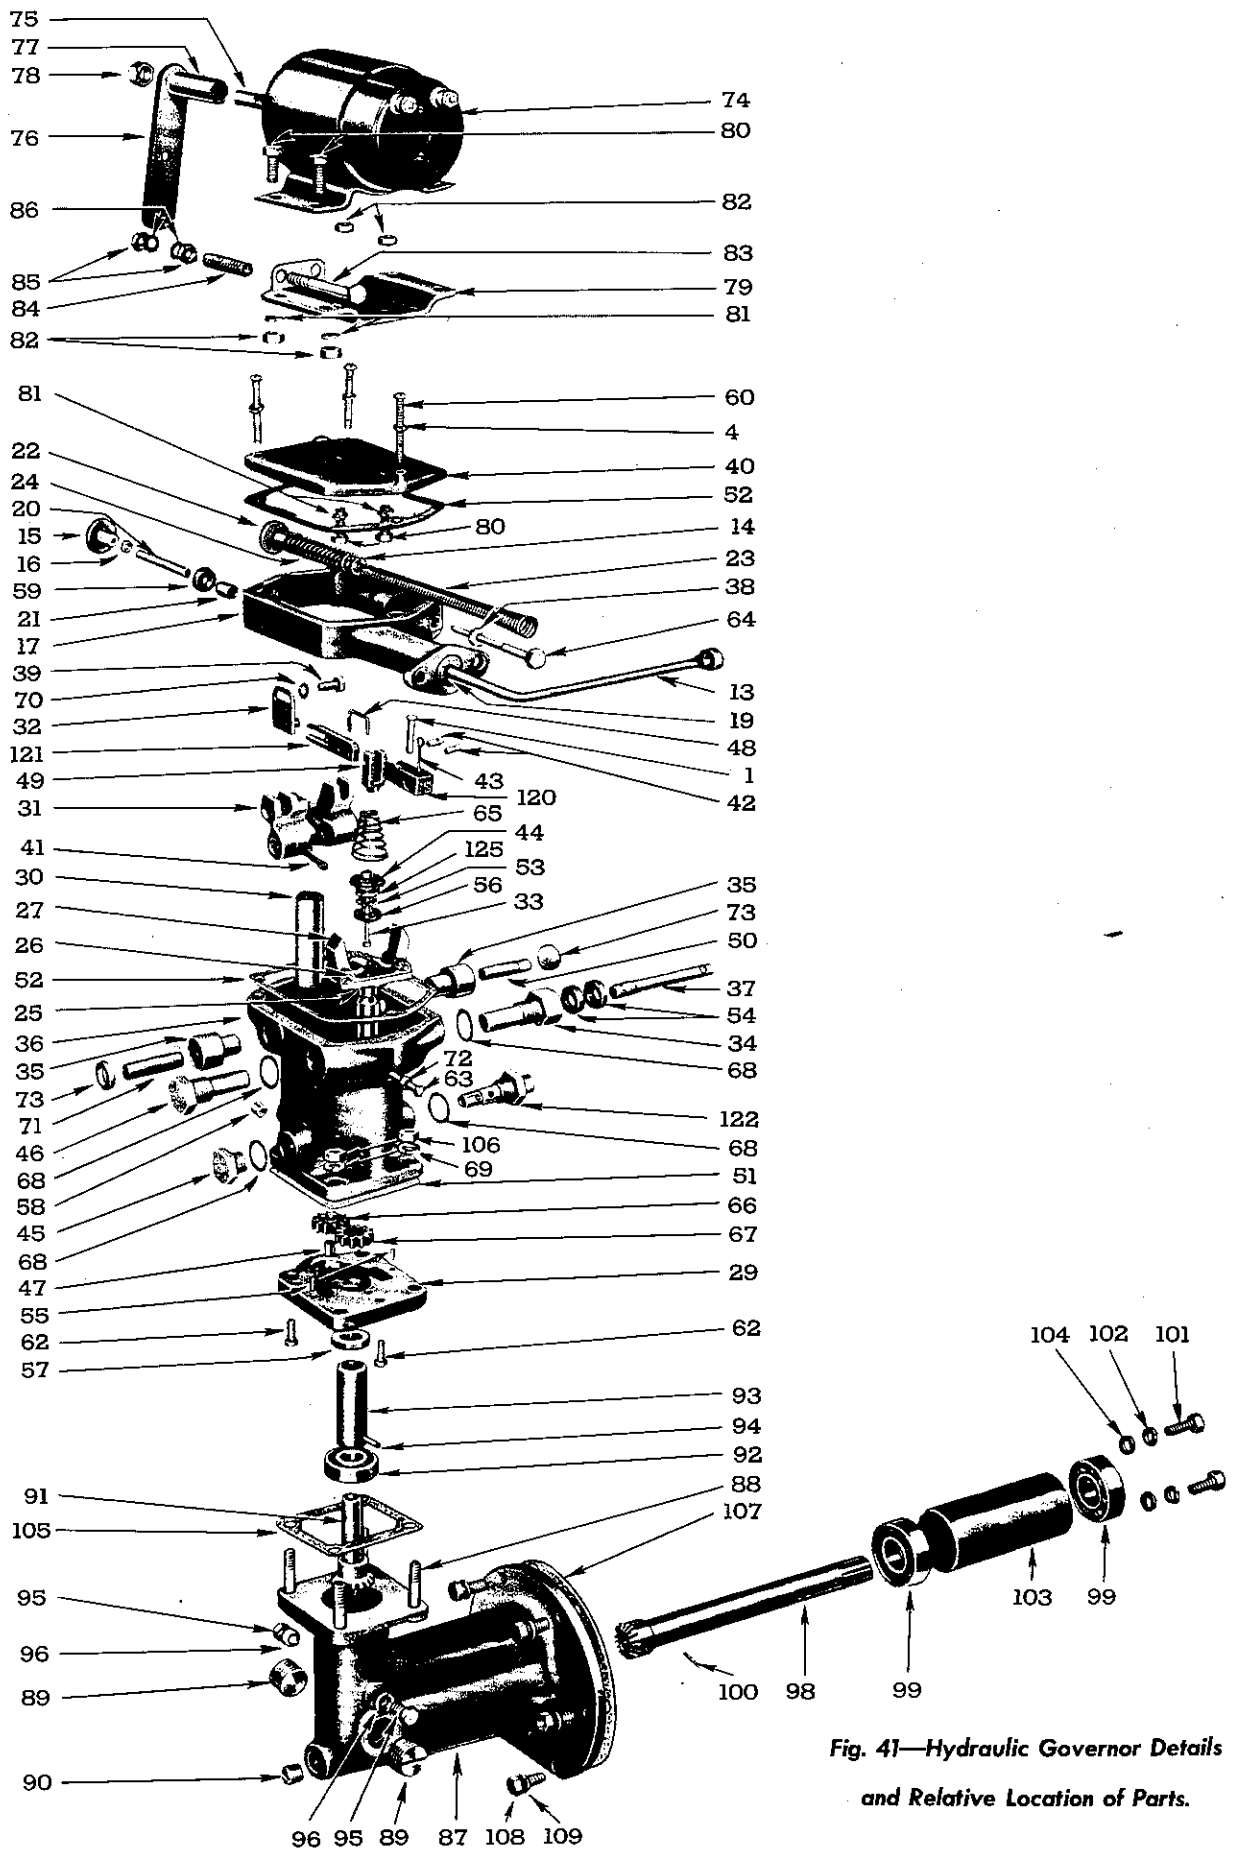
Hydraulic Governor Details and Relative Location of Parts.
